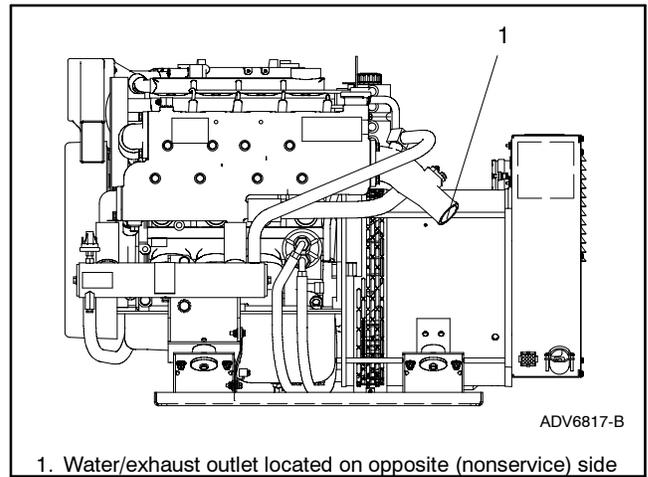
Mixer Elbow/Exhaust Connection, 10/13/15EG, 9/11EFG, and 13/15EGZ
